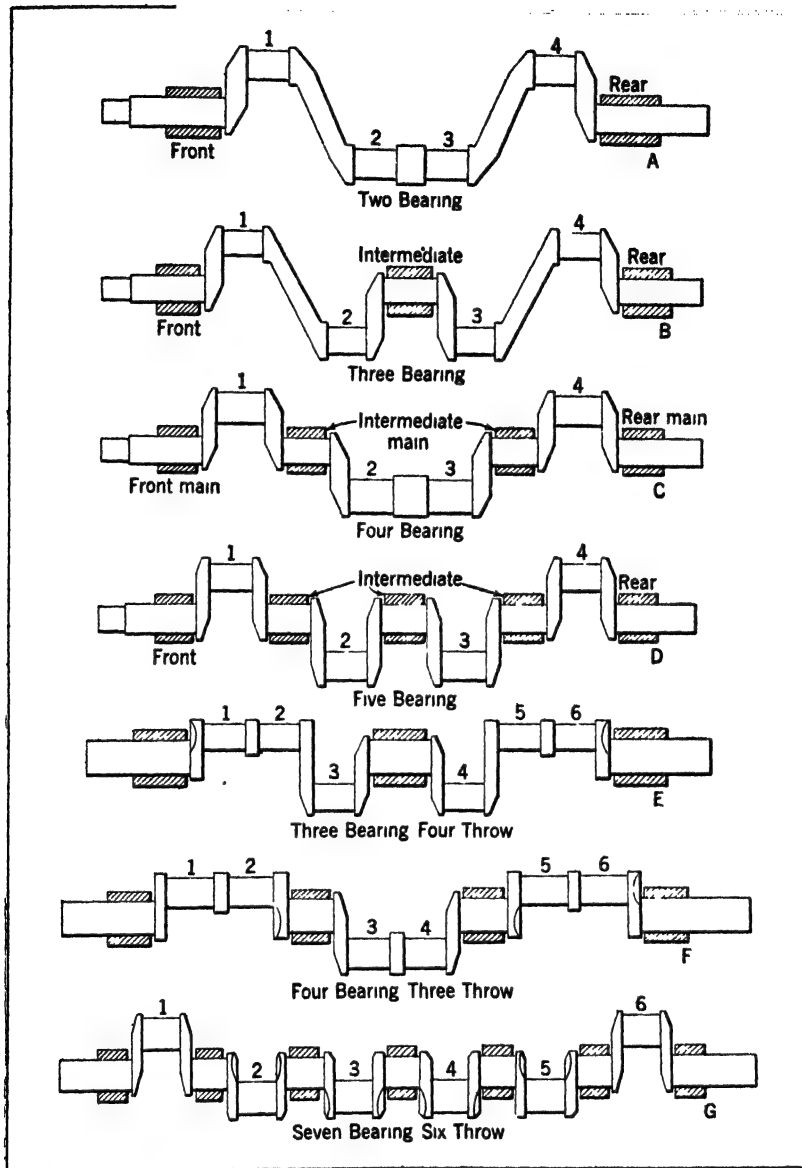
Various Types of Four and Six Throw Automotive Crankshafts, Showing Possible Combinations of Main Bearings.
